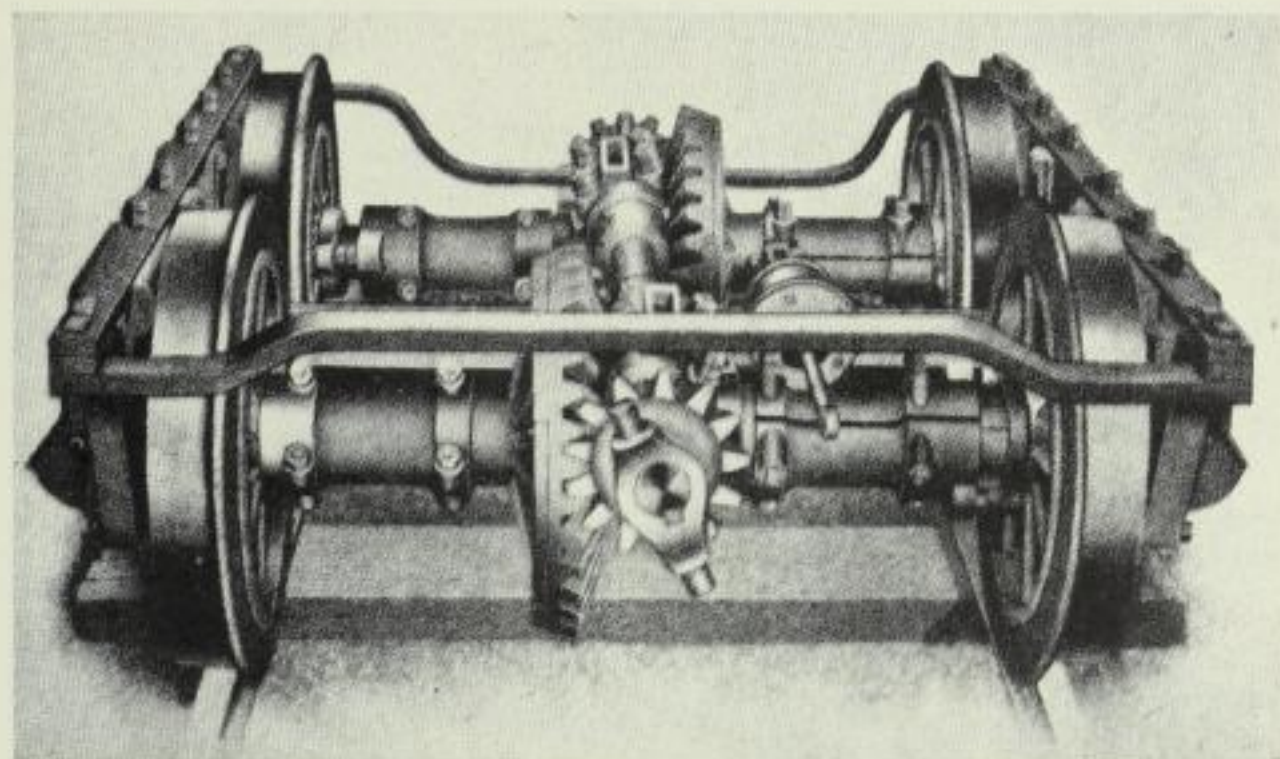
End View of Truck with Bolster removed, showing Gears, Climax Locomotive.
